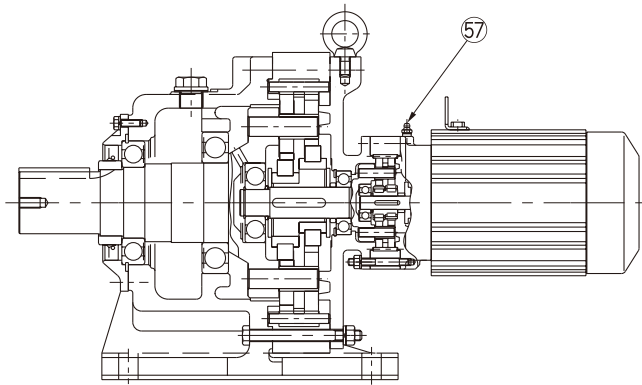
Type CHHM (Horizontal, Gearmotor)
